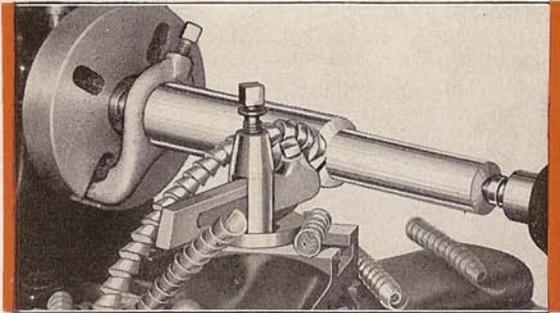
Reducing Diameter of a Steel Shaft $\frac{1}{4}$ " in One Cut.
